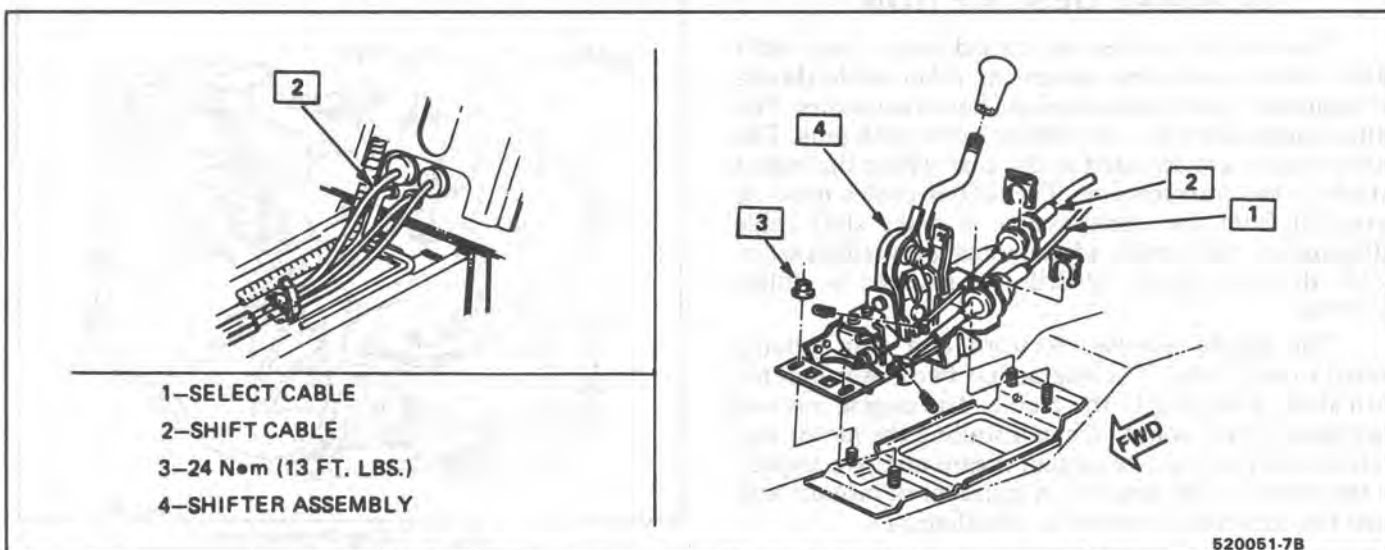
Shift Cable &amp; Select Cable Routing and Cable Attachment at Shifter
